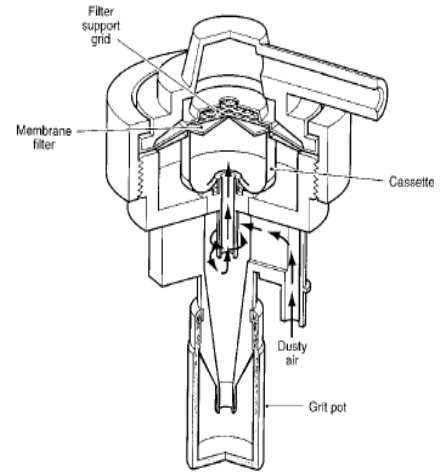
Exploded view of a respirable dust cyclone. (SKC)
